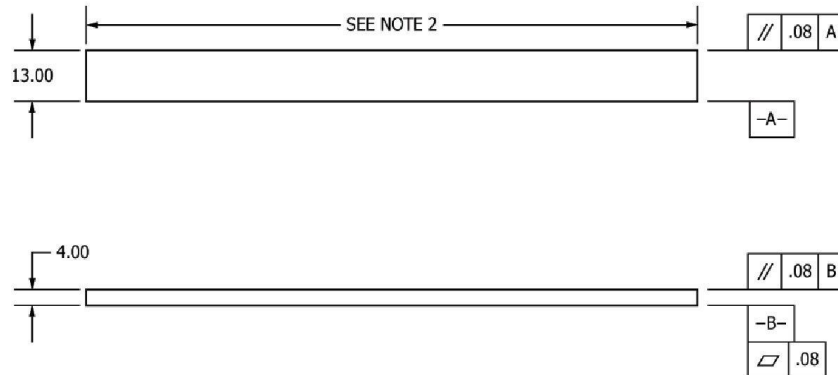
Standard Flexural Test Specimen Drawing (SI)
